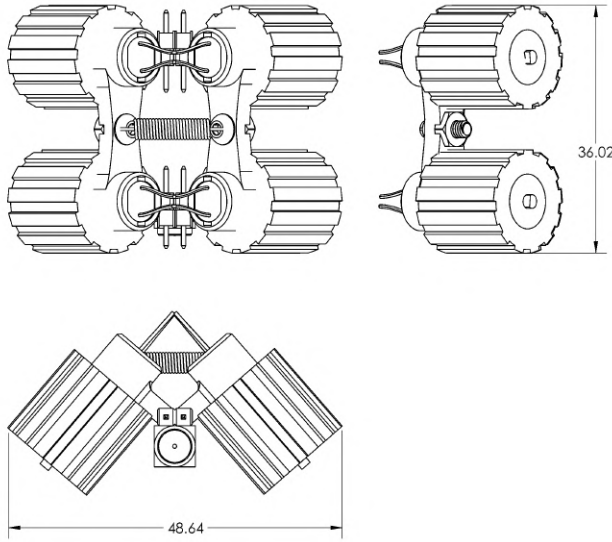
CAD model of final robot showing wheel layout and compliant spring attachment.
